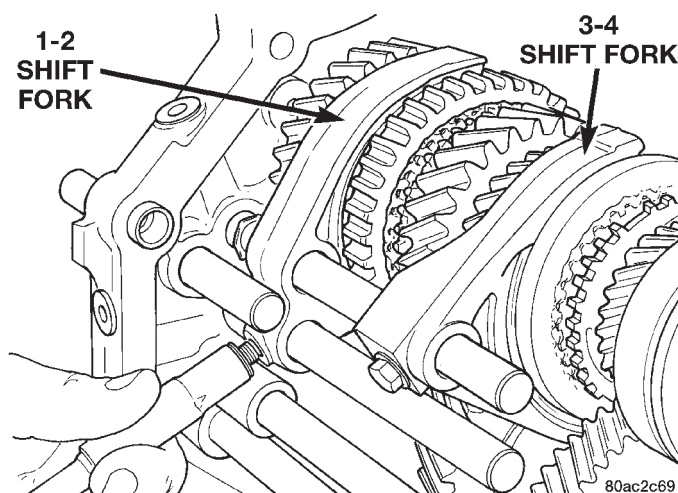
Remove Shift Fork To Shift Rail Bolts
